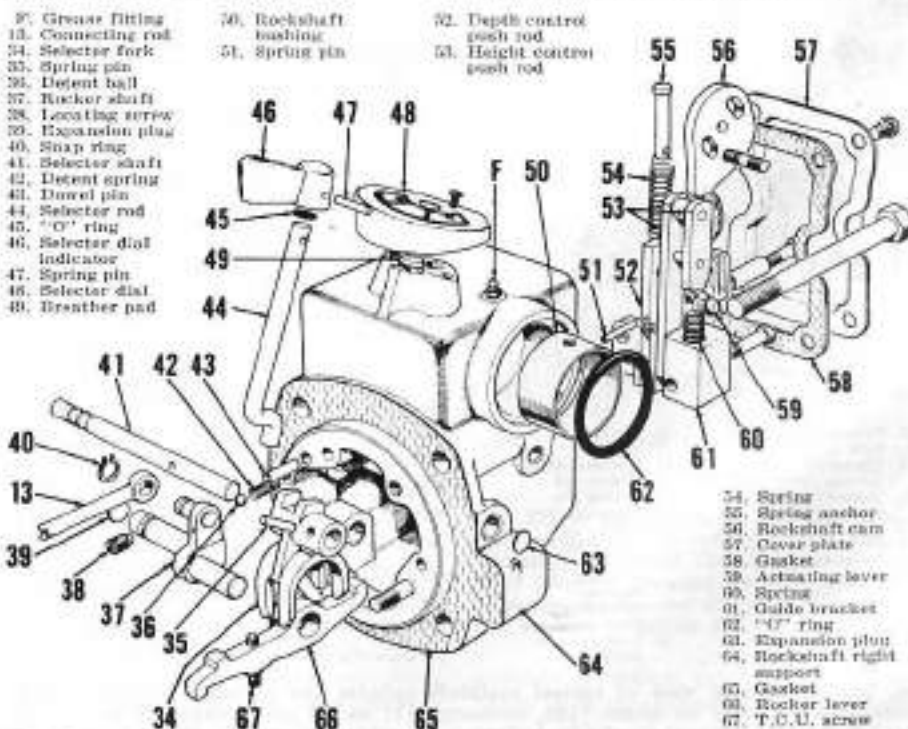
Exploded view of hydraulic system control mechanism that is mounted in rockshaft right hand support bracket (64). Note that connecting rod (13) is also shown in Fig. 204. Refer also to the assembly view in Fig. 206.
